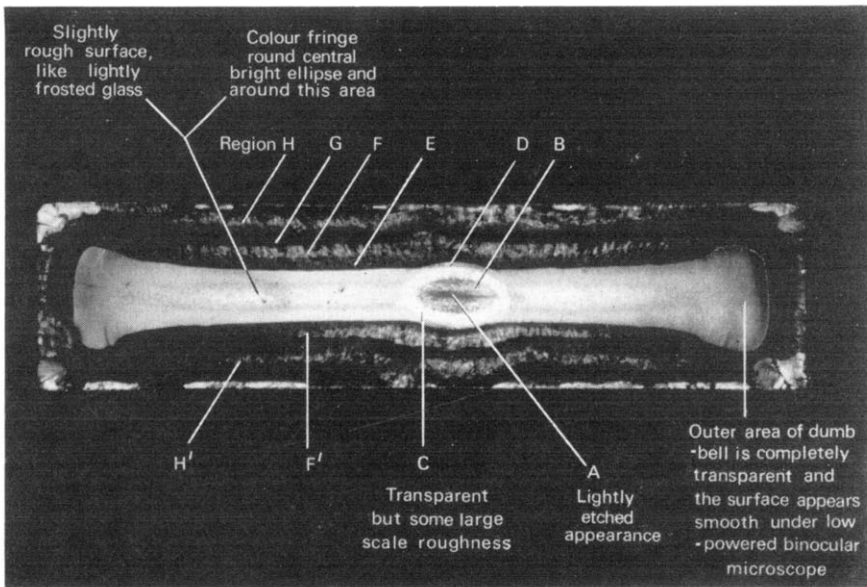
Visual appearance of fracture surface ($\times 8$)
